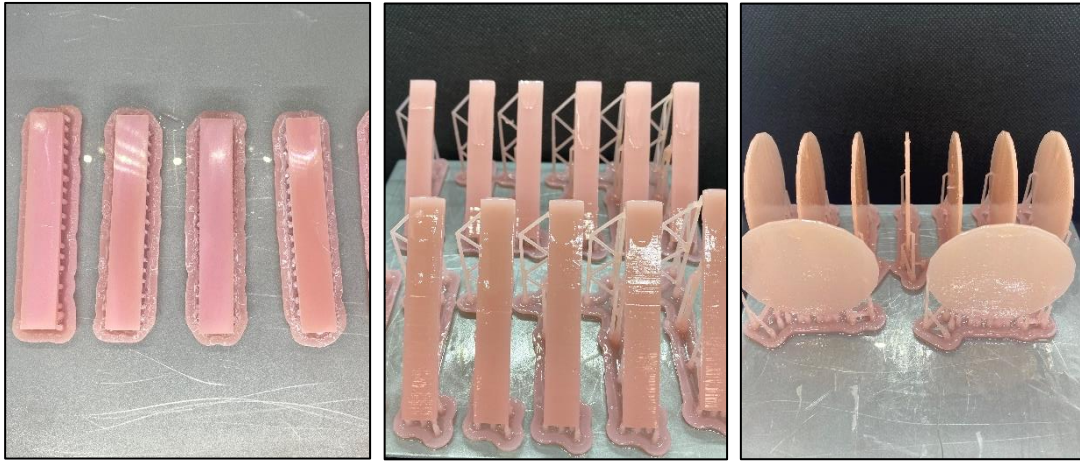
Specimens attached on the build platform after the printing process was finished.
